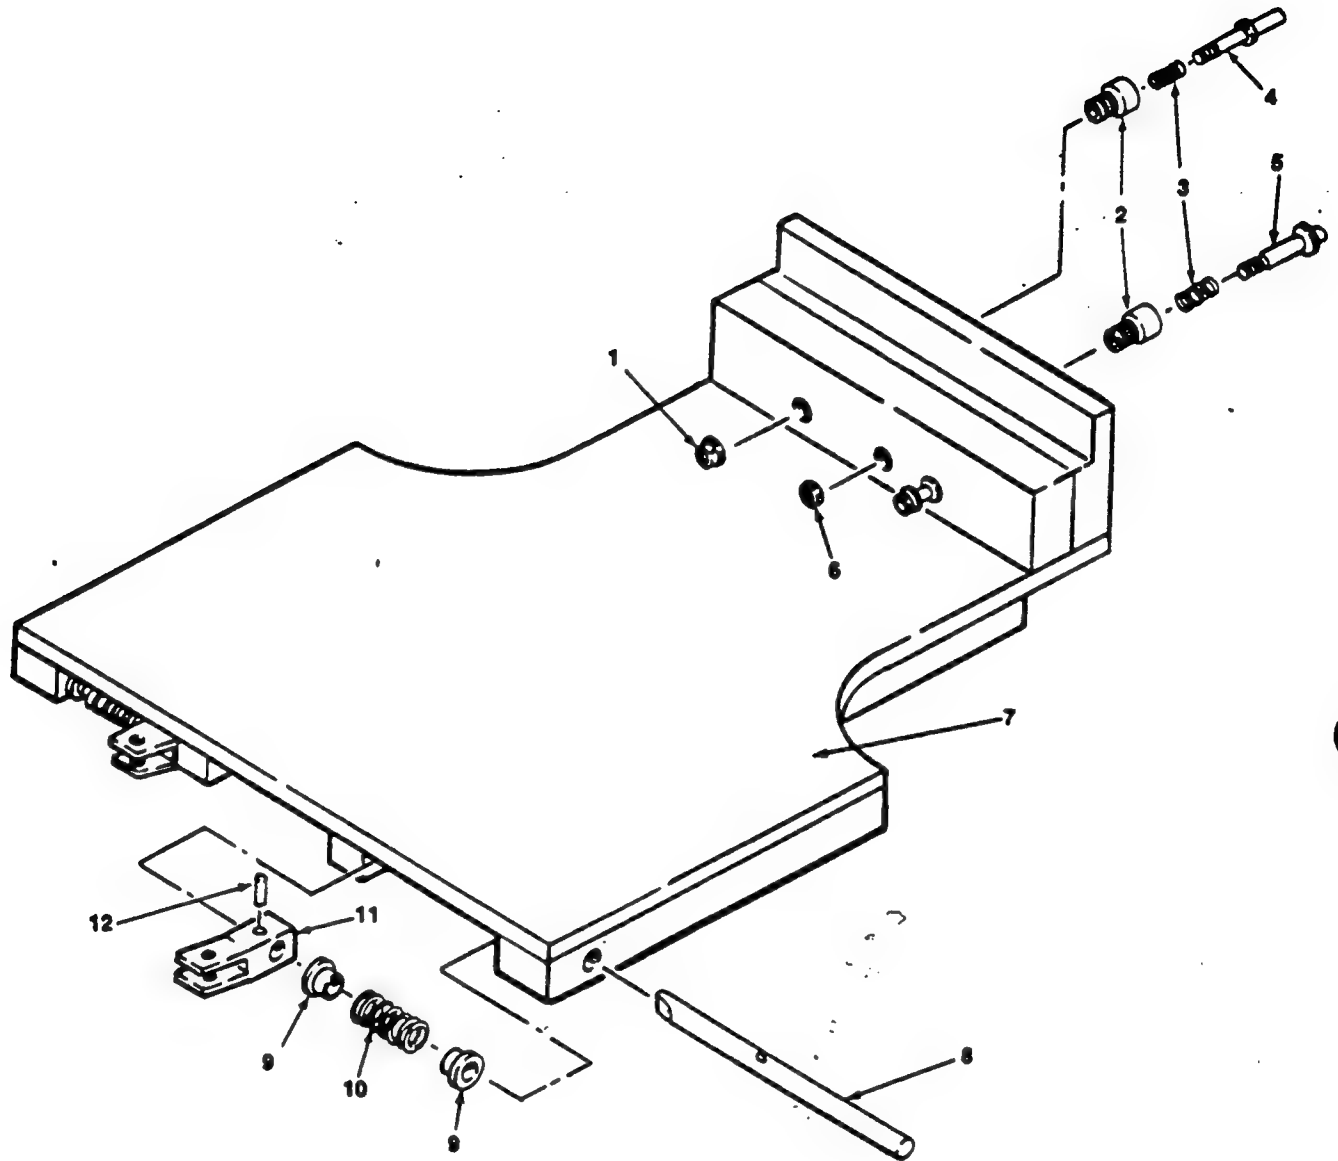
2080 COMPAT LOCKING DEVICE (Sheet 1 of 2).
